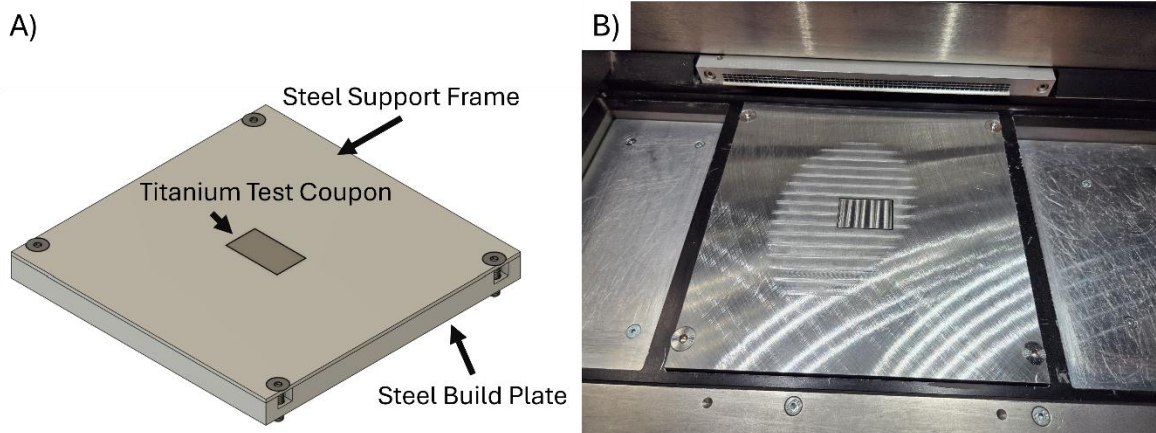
Details of the experimental arrangement for spatter generation and capture. (A) Schematic showing the build plate tooling setup for the weld test coupons and (B) photo of the tooling setup installed in the M290.
